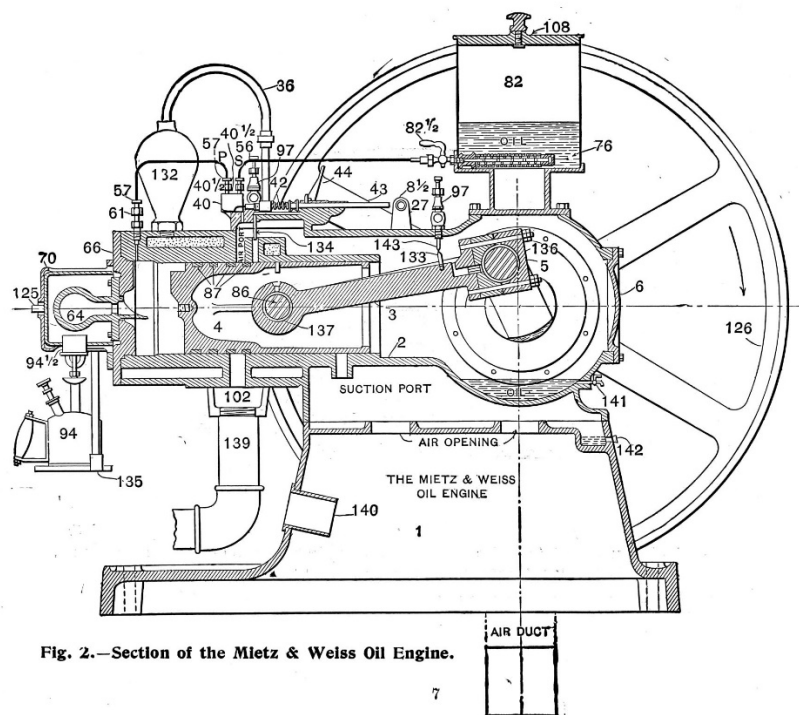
Section of the Mietz & Weiss Oil Engine.
